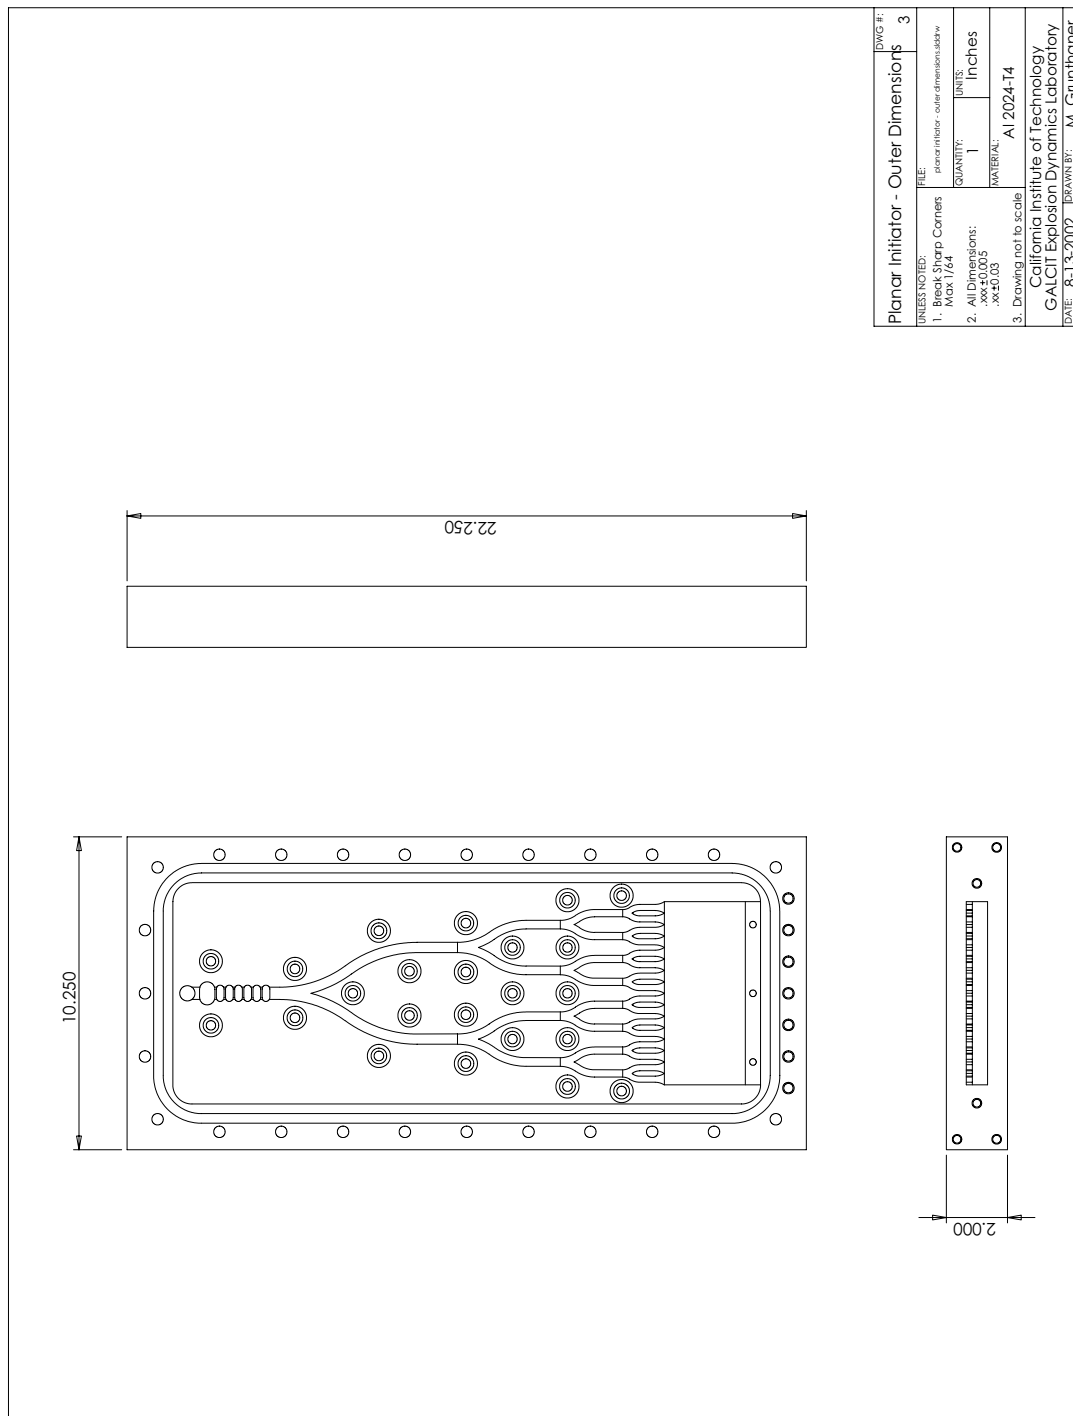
Planar Initiator - Outer Dimensions, Dwg No. 3
